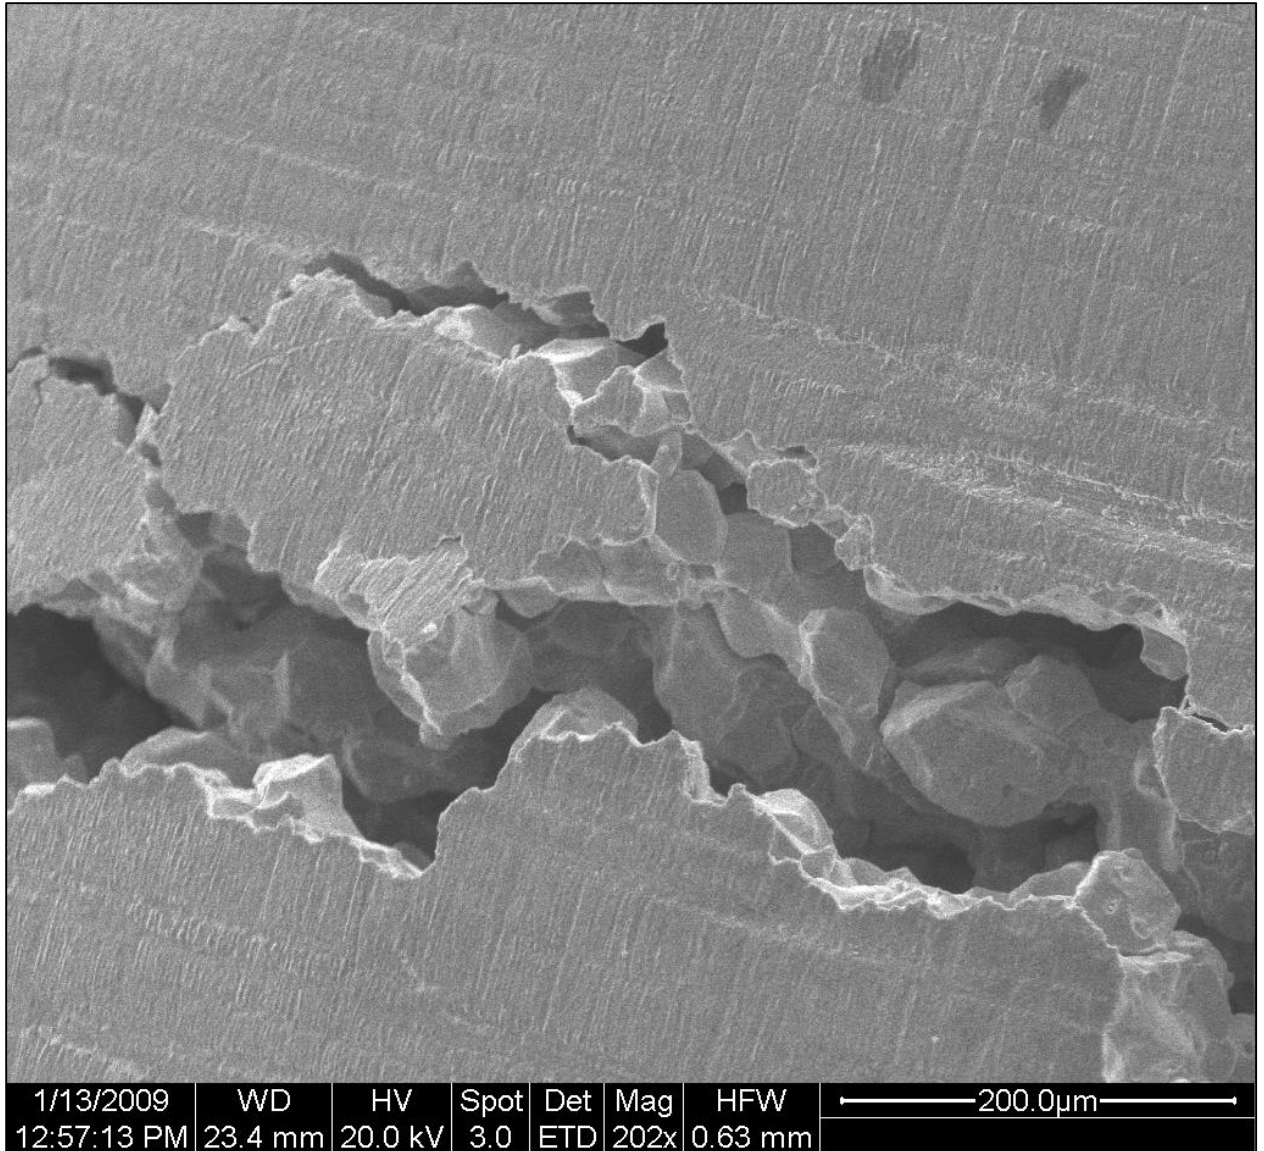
A secondary crack forming just beyond the fracture surface of the Inconel 718 nil-strength sample has a different appearance. Grain surfaces can be seen, with sharp corners and flat edges clearly evident. Temperatures in this region are lower than at the fracture surface.
